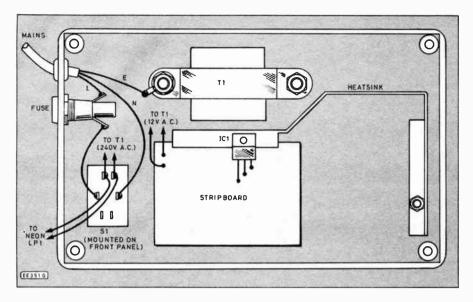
Layout of components inside the case and wiring to the power supply section.
